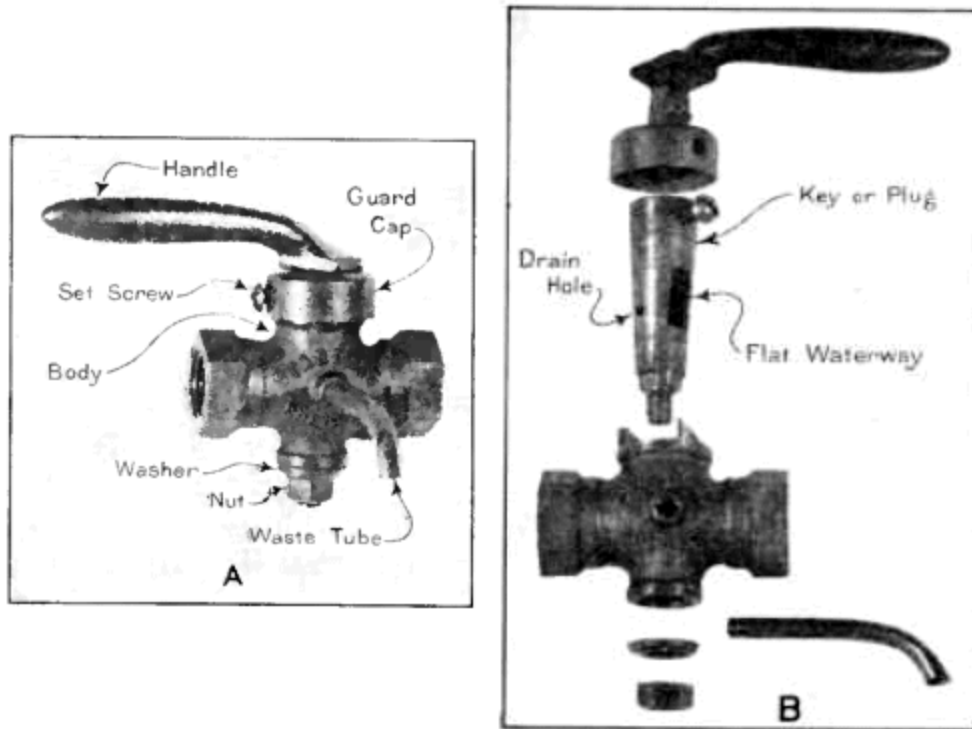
Stop and waste cock; A, parts assembled; B, parts unassembled.
